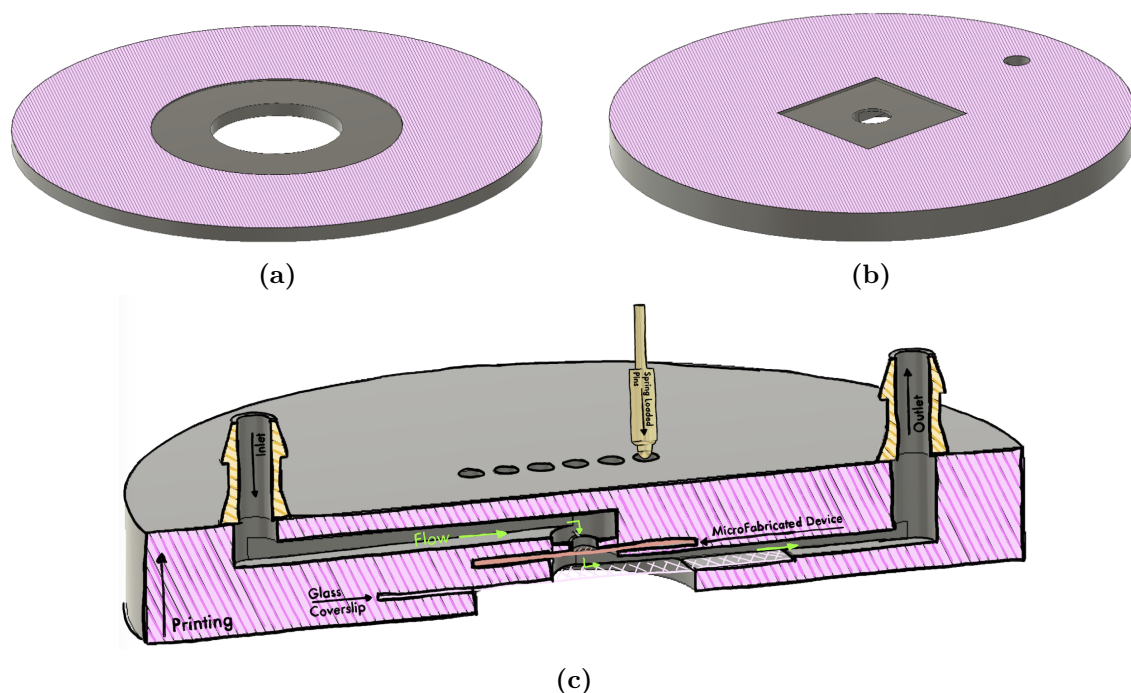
3D Printed (SLA) Microfluidic Chip Fabrication Process. Integration of the glass coverslip (a) followed by the integration of the microfabricated device (b). The upper fluidic canal and connectors are then printed on top of the two integrated objects (c).
